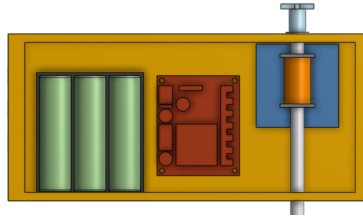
Velocity Mechanism Inner Workings (Left to Right) Batteries, PCB, Magnetic Coil
